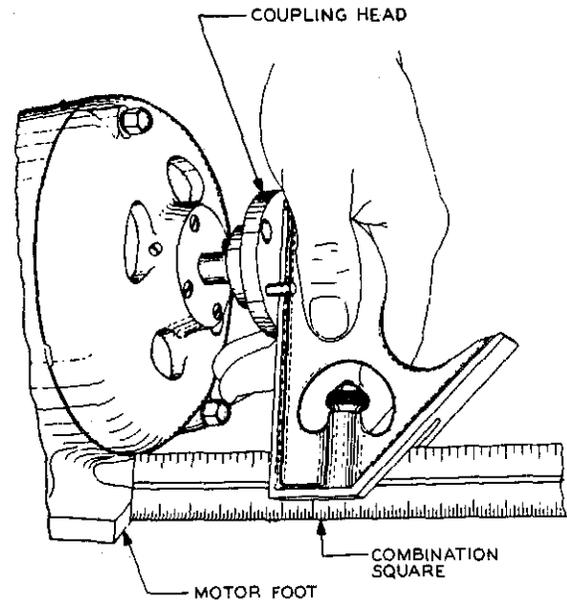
Method of Measuring Distance Between Motor Coupling Head and Motor Foot
